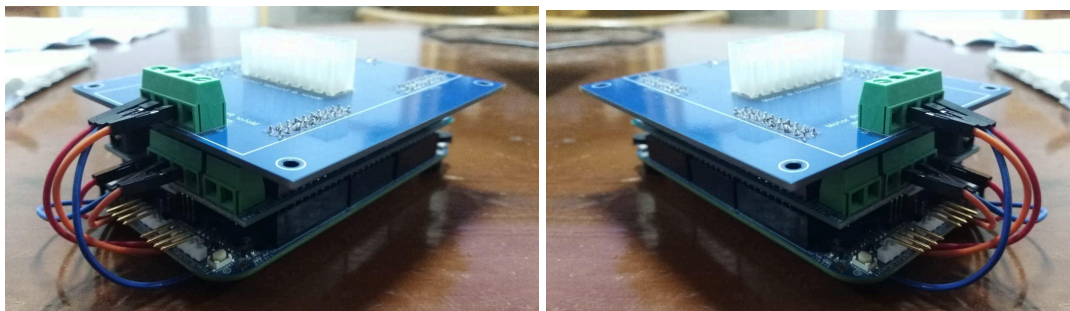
MCU Board, Inverter Board & Adapter PCB after attachment
